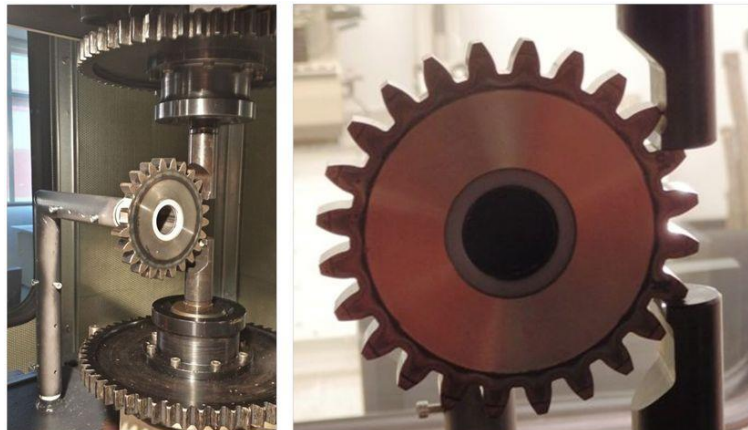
Fatigue test performed over gears in the RUMUL machine.
